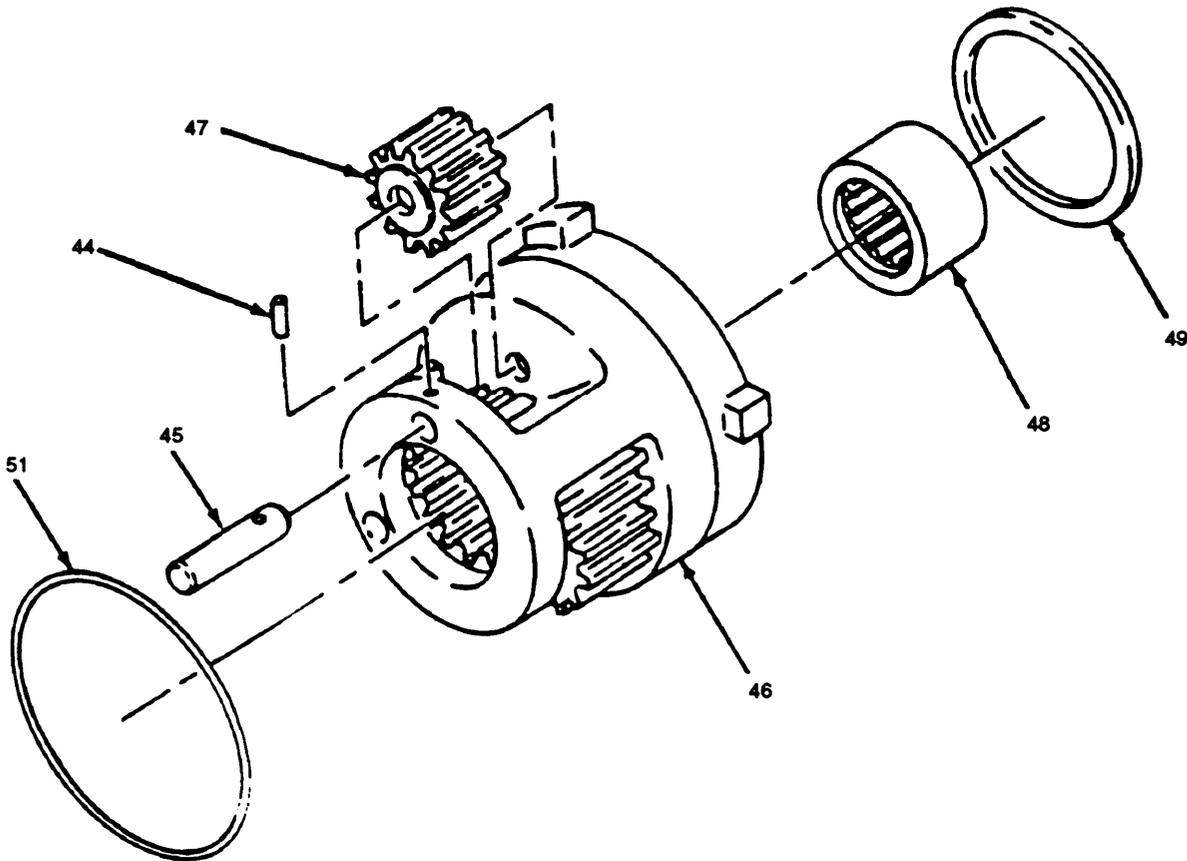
Winch Assembly Model PG-115-043R, Reassembly (Sheet 4 of 7).
